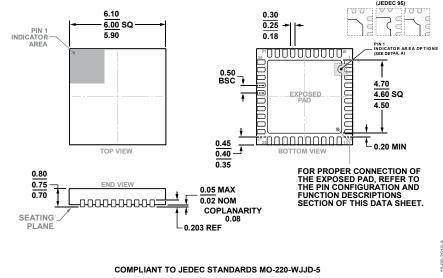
40-Lead Lead Free Chip Scale Package [LFCSP] 6 mm × 6 mm Body and 0.75 mm Package Height (CP-40-7) Dimensions shown in millimeters
